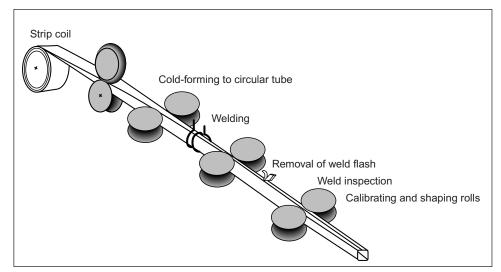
Longitudinally welded structural hollow sections. Manufacturing principle by cold-forming
